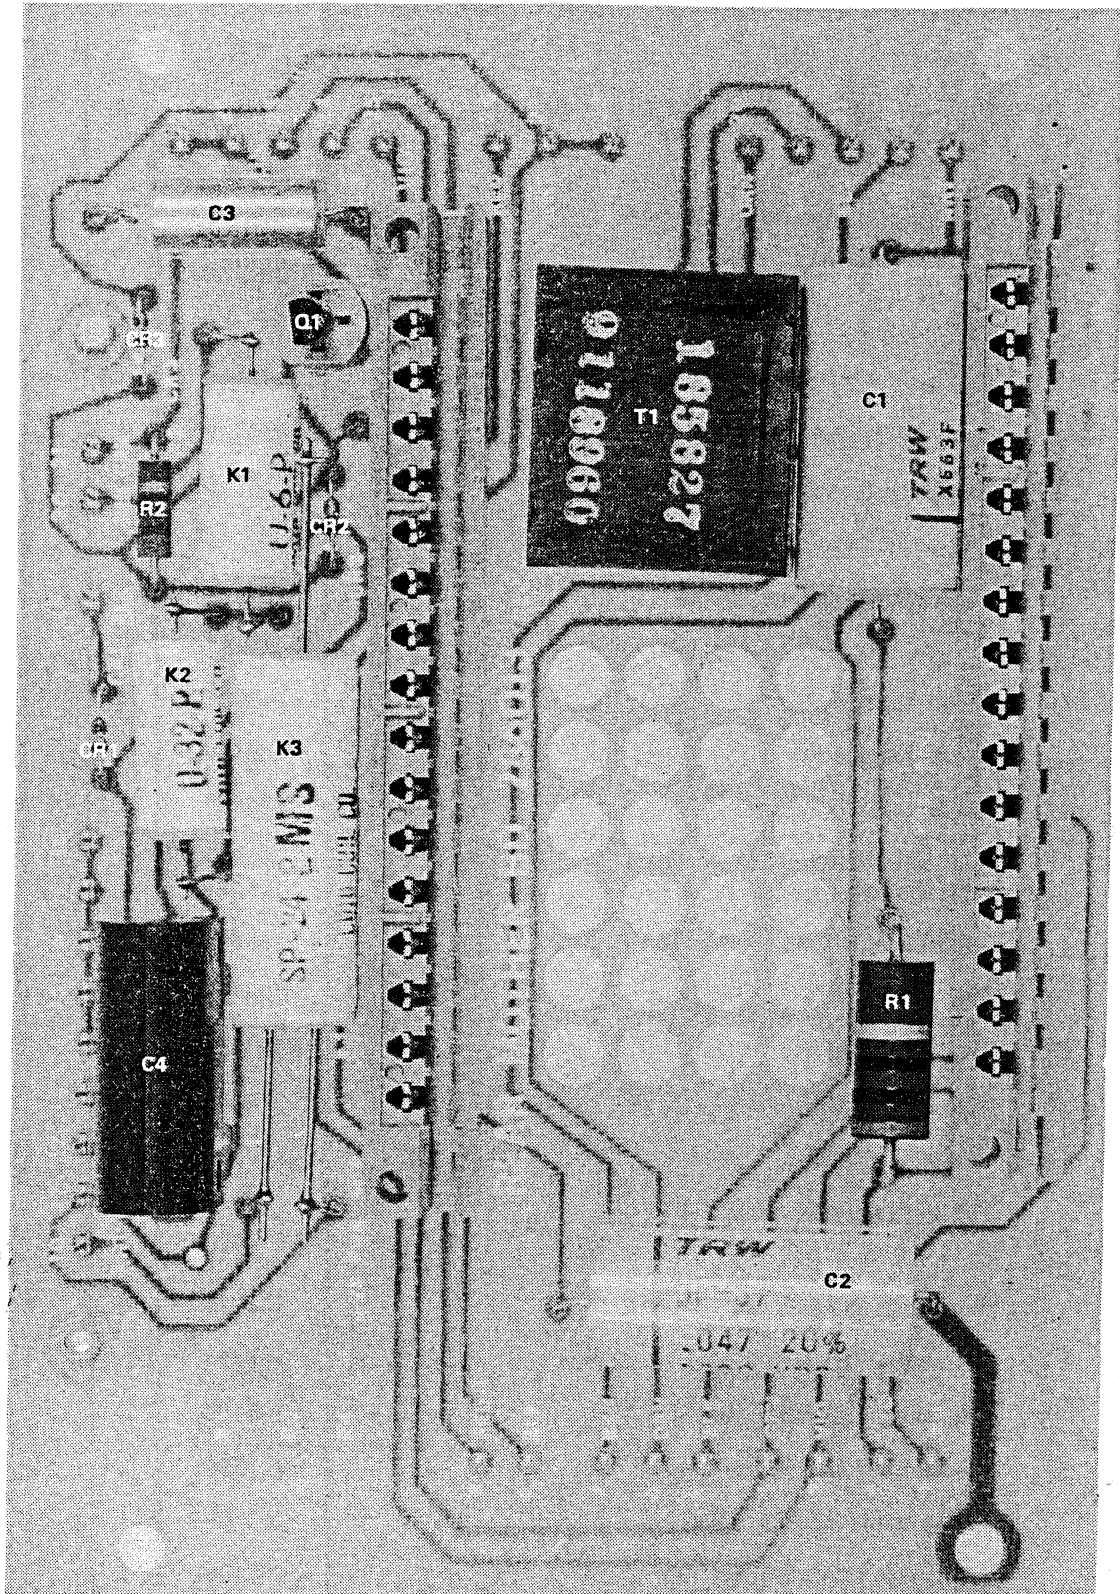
REAR MOTHER BOARD ASSEMBLY
